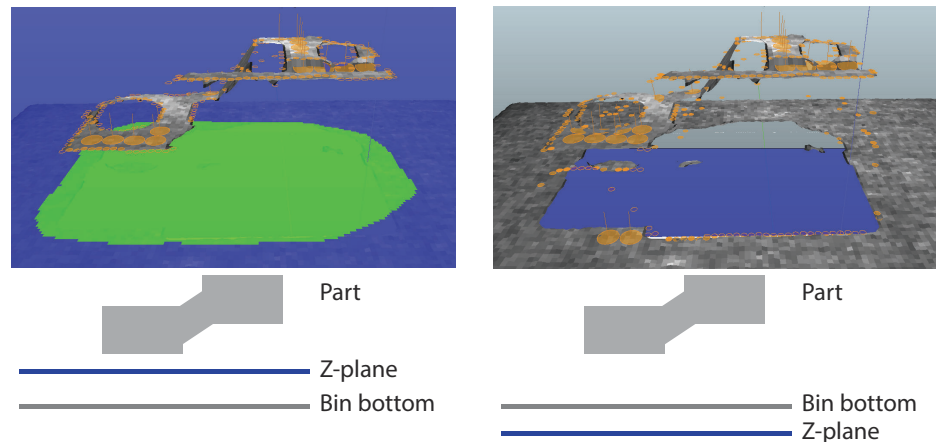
Left: Good teach. Right: Surface and edge indicators on the underlying surface.
